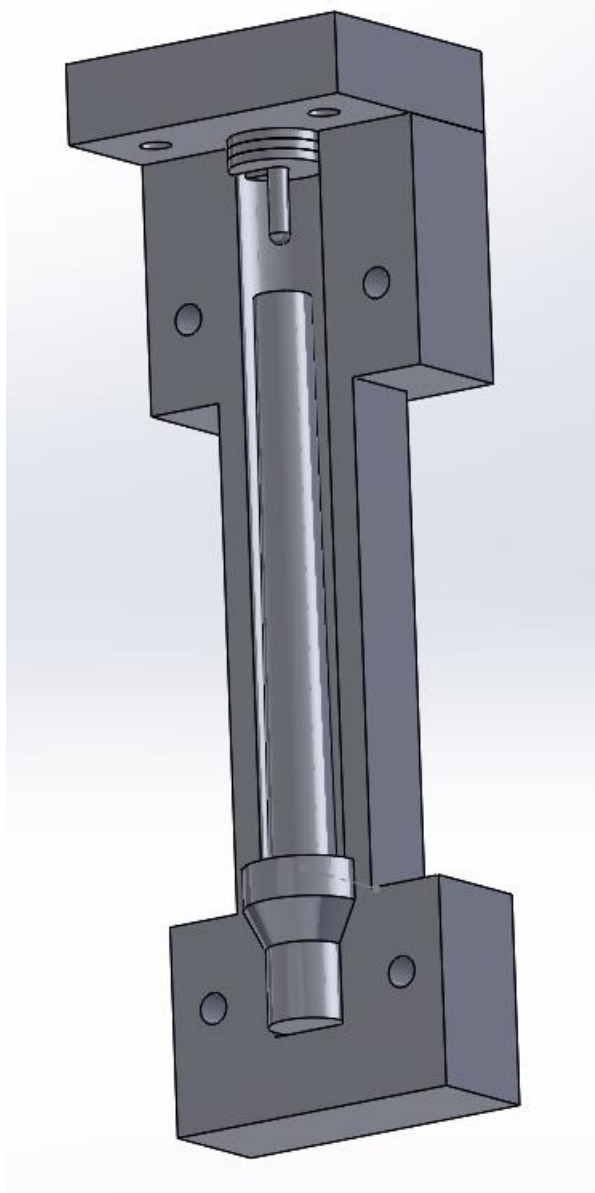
Cross-section view of compression mold used to produce carbon block samples.
